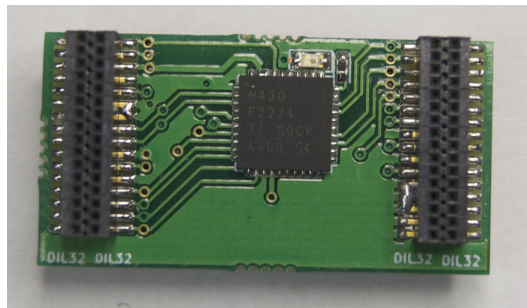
Microcontroller Module – prototype 1 PCB layout.
